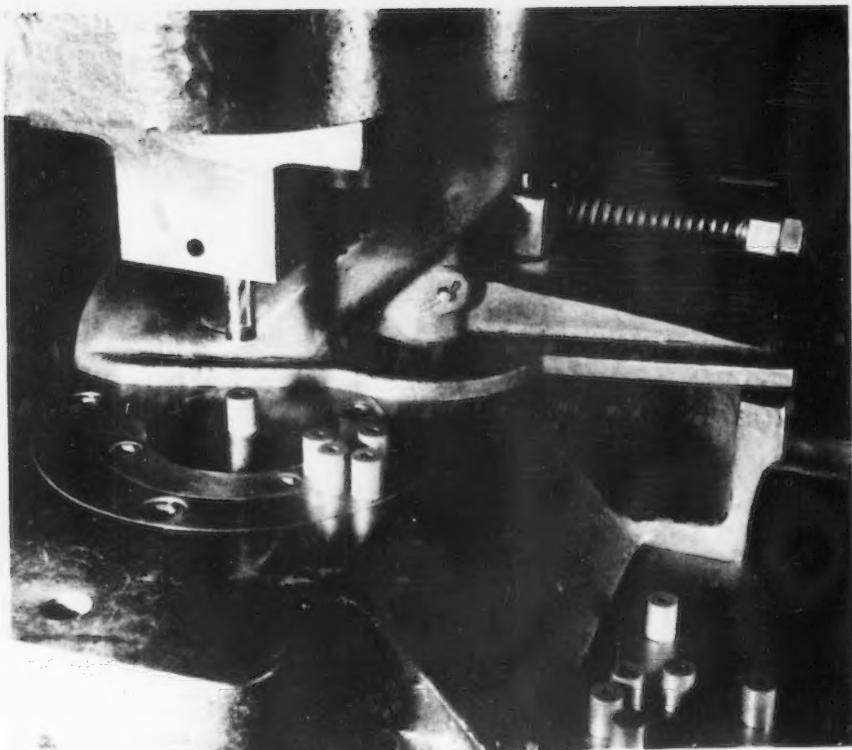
A double-acting press compacting cylindrical magnets containing cored holes.
